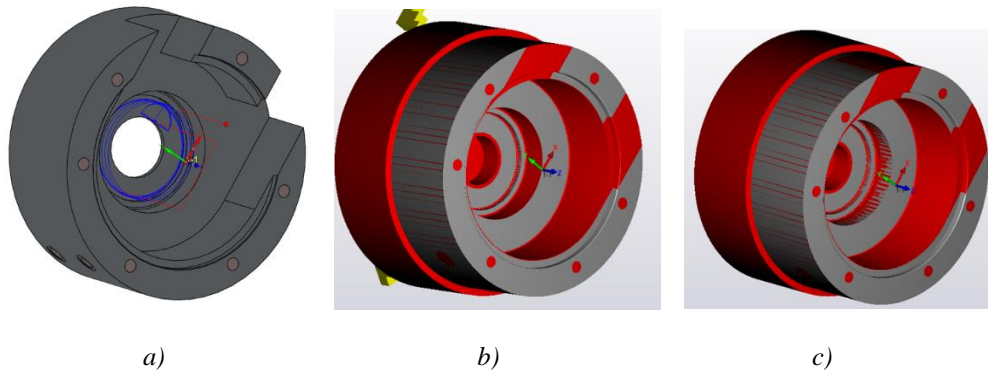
Toolpath of the inside roughing of the hole  $\varnothing 70$  (a) Rest material after the inside finishing of the hole  $\varnothing 70$  (b)
